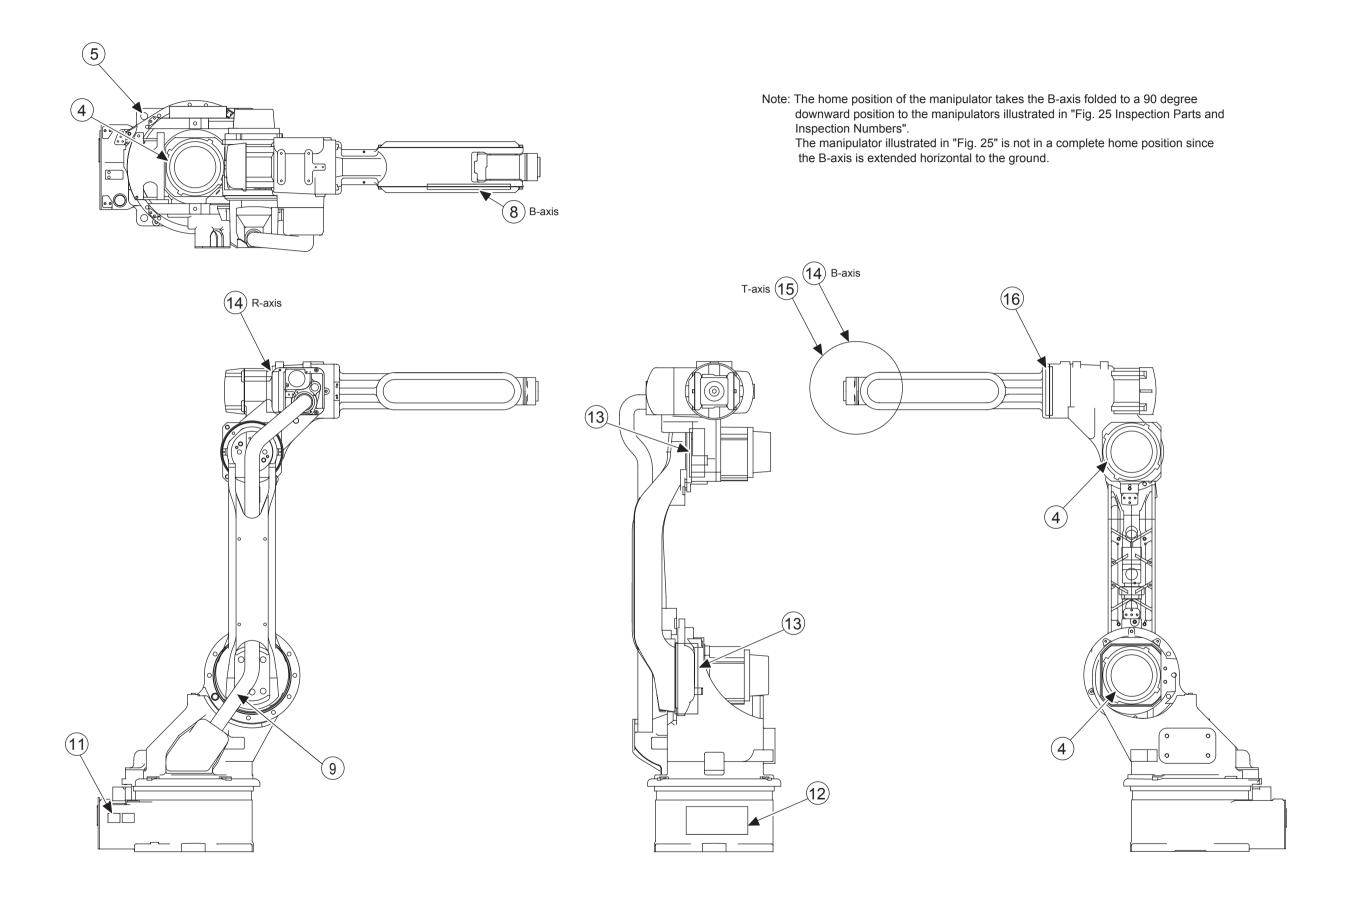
Inspection Parts and Inspection Numbers (Manipulator in Home Position: Except for B-axis)
